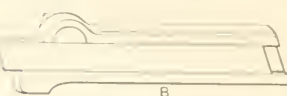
Cutting-off Tool-holder with a Wide Top Cutter.
